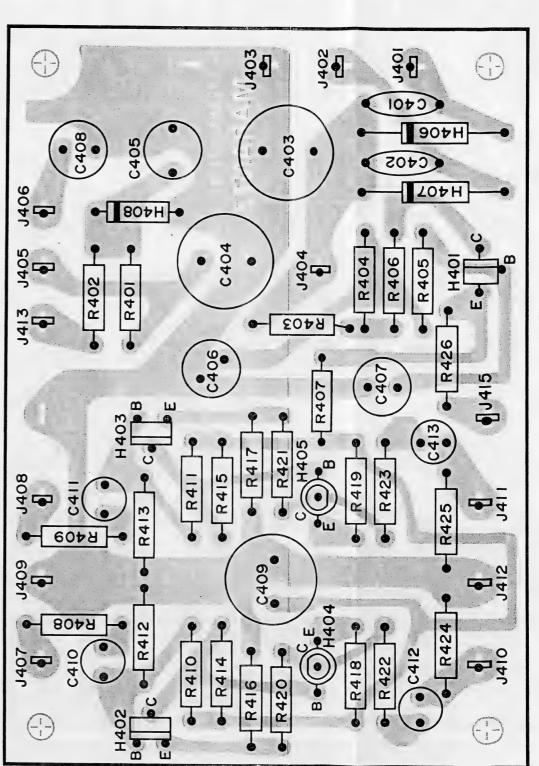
Pre-Amplifier and Power Supply Assembly P400 Component Locations
